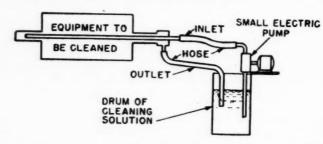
A typical set-up for cleaning scale chemically from the internal surfaces of mill rolls, Banbury rotors, and jackets and screws of tubing machines.
